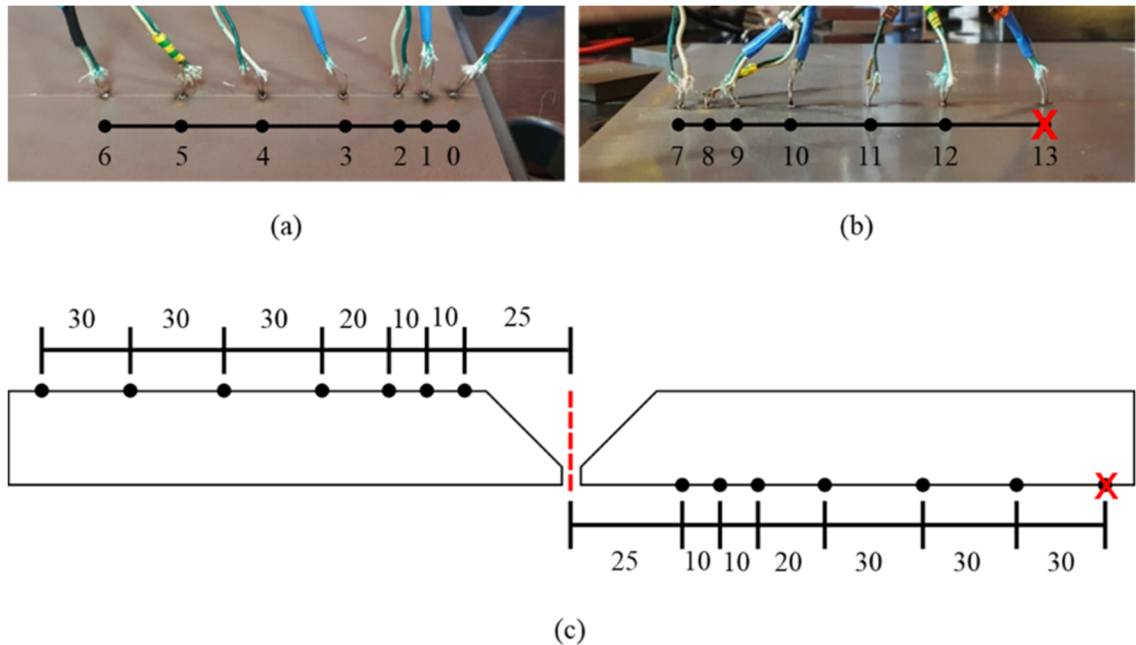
Thermocouple placement on (a) top surface of left-hand plate and (b) bottom surface of right-hand plate. (c) Thermocouple placement measurements taken from centre of weld preparation in millimetres (not to scale). [139]
